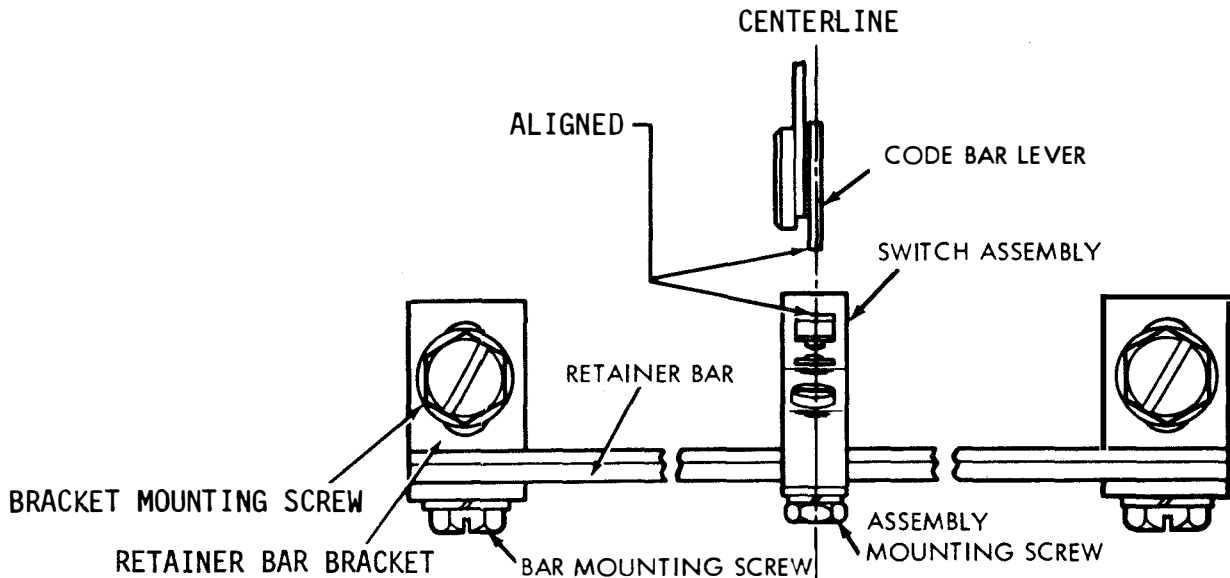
Keyboard Universal Switch (Preliminary), Front View
